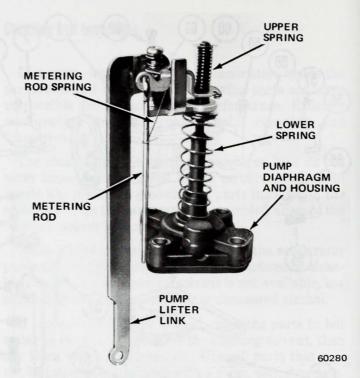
J-47 Accelerator Pump and Metering Rod Assembly
